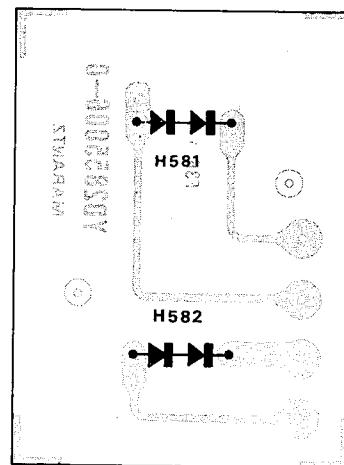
Meter Rectifier Unit Assembly P550 Component Locations
